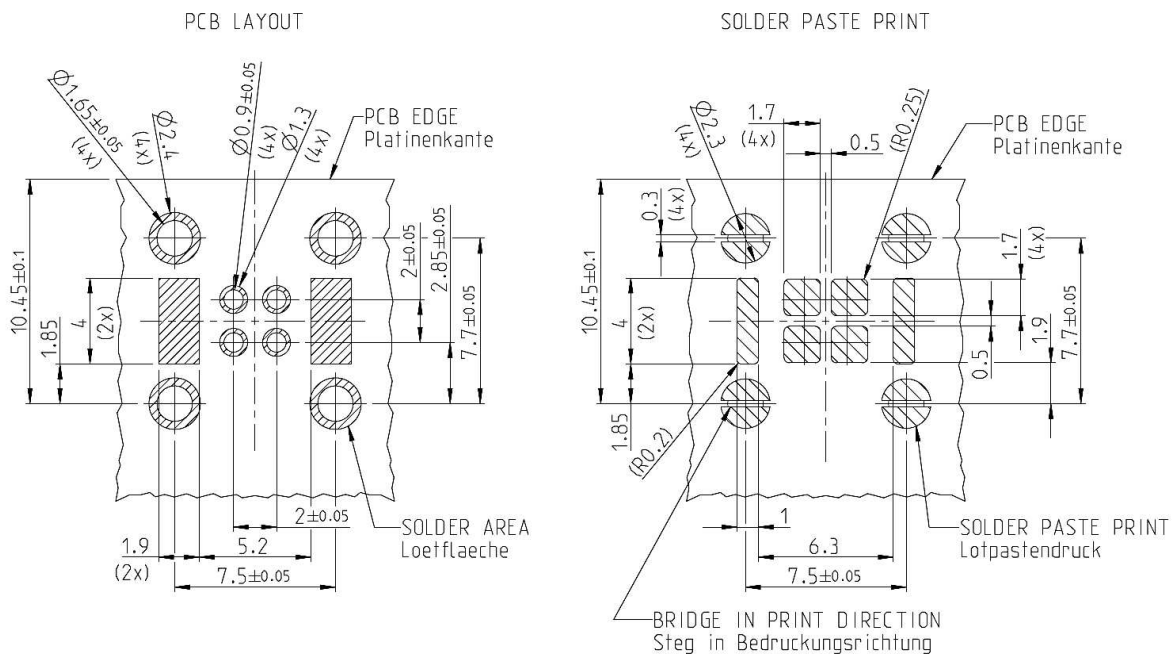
/ Bild 6: Layout for HSD Header 90° TE-No. 2286546
